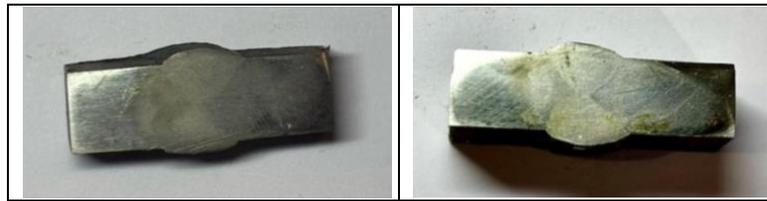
Cross sectional cuts of few welded specimens revealing full penetration.
